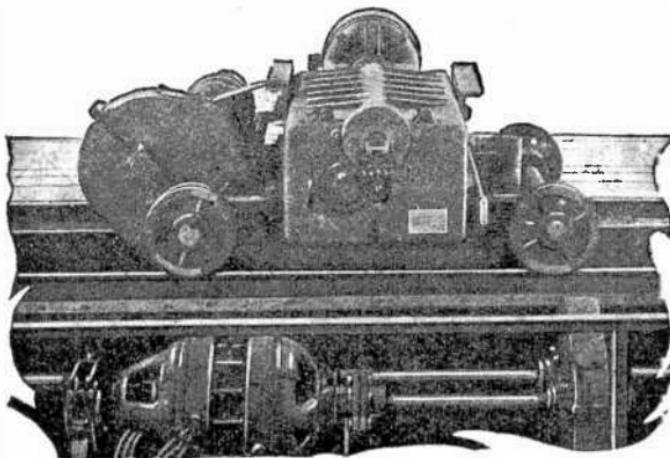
,885.—*Euclid crane construction 12. Another view of moderate duty trolley.* The illustration also shows the disc type electric brake that is located on the end of the motor shaft.
